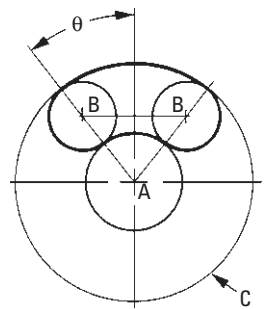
(b) Condition No. 2 of Planetary Gear System
